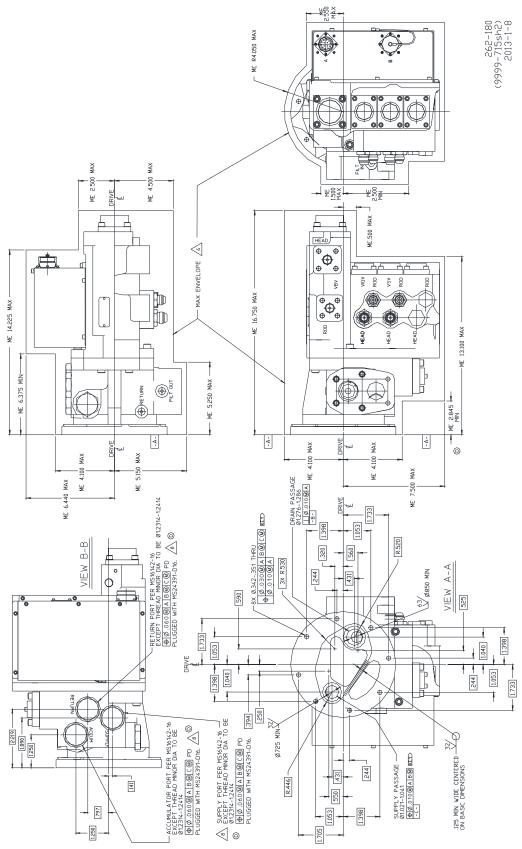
Outline Drawing of 9902-364 HCU (2 channel)
